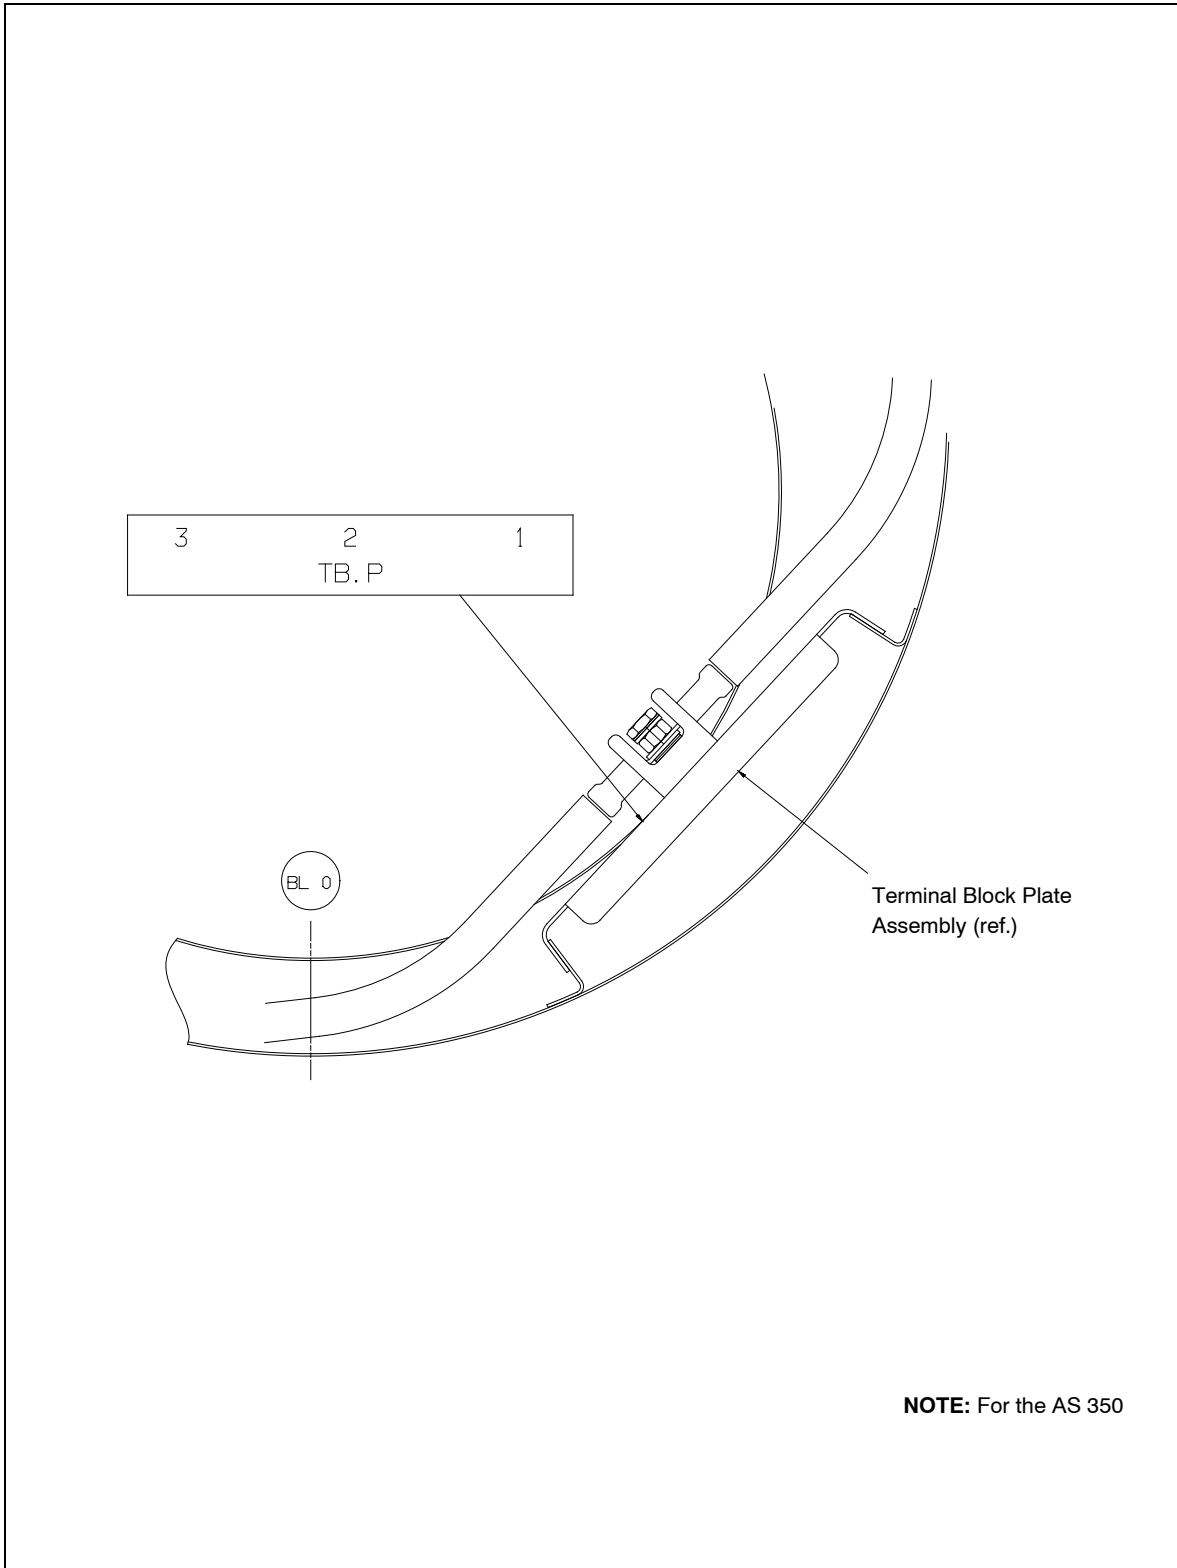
Marking location on typical AS 350 terminal block plate assembly for the terminal block plate (TB.P) at STN A156
